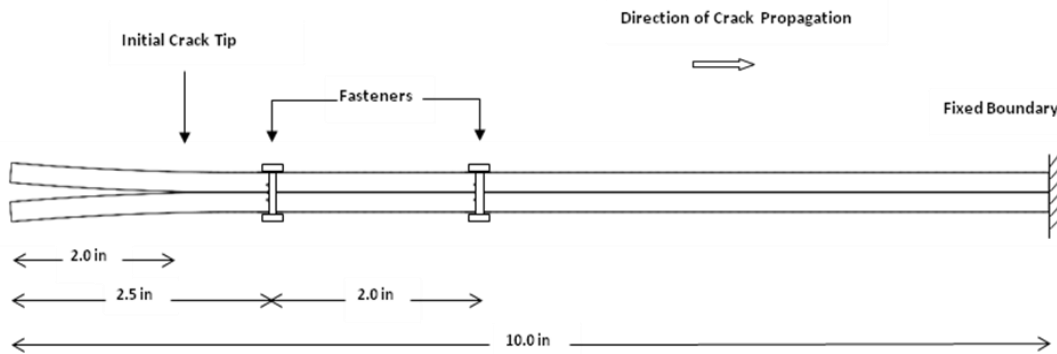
The 2-D Schematic of Fastener Crack Arrest Mechanism
